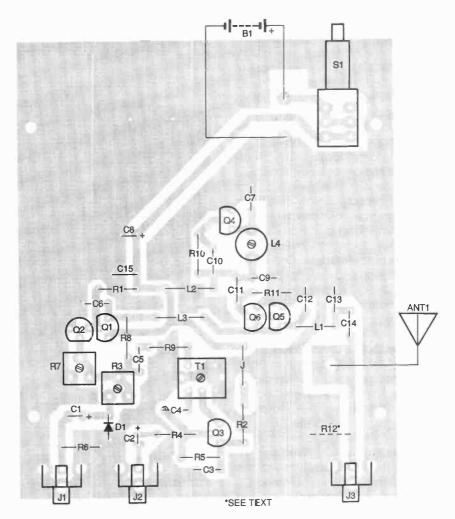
Building the project is easy if you use this parts-placement diagram. Resistor R12 must be tack soldered on the solder side of the board between the antenna output and ground.
